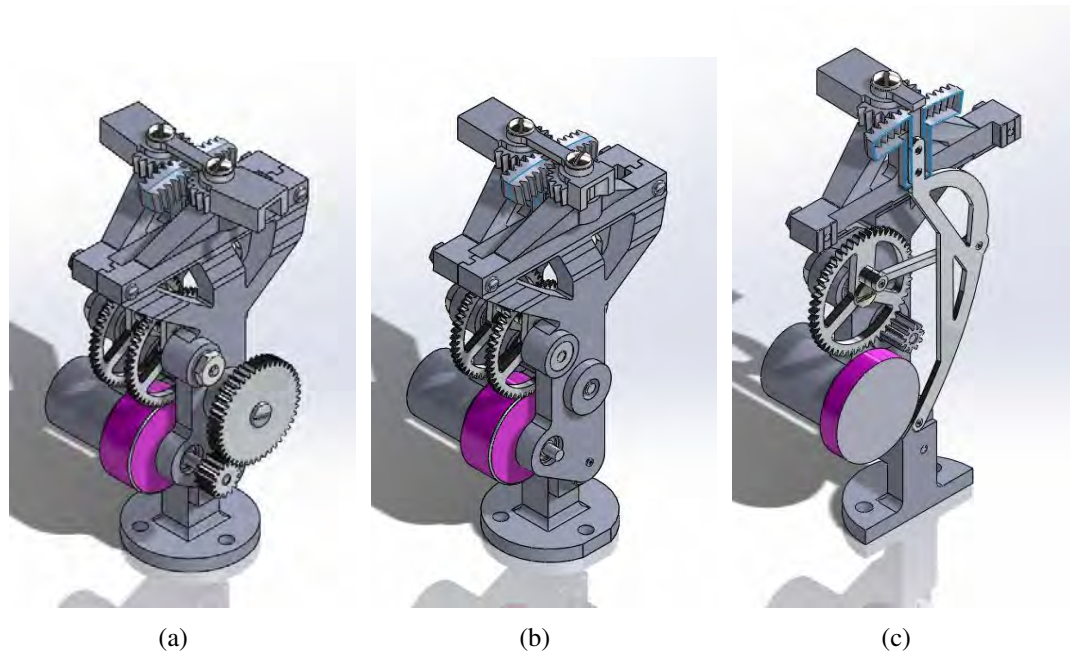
Isometric Sectioned View of Horizontal Flapper
